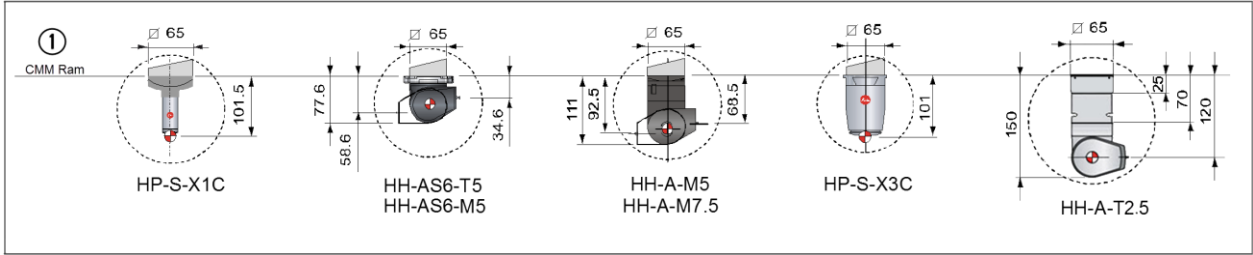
Overall Dimensions of the Machine - 05.yy.05 Models
